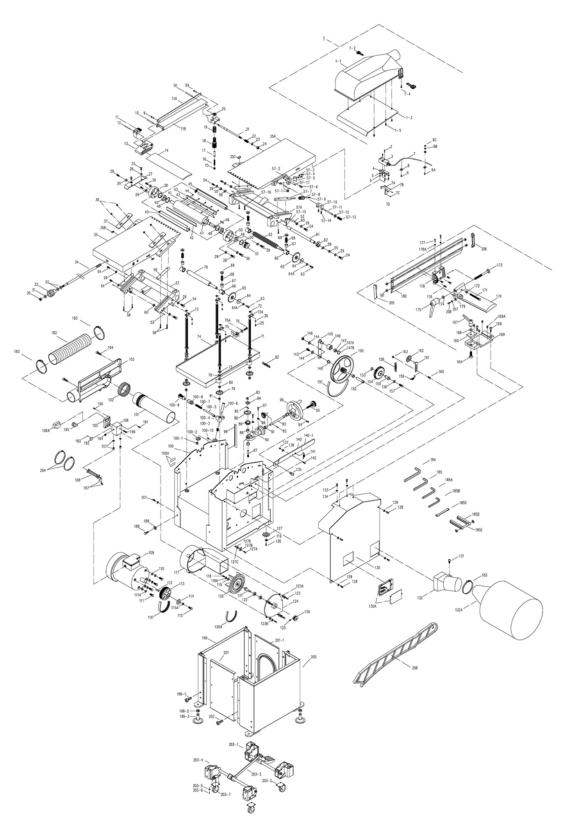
Spare parts drawing Planer-Thicknesser ADH 2540
